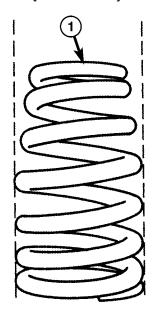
Valve Spring - Type A 1 - VALVE SPRING (TOP - SMALLER DIAMETER)
